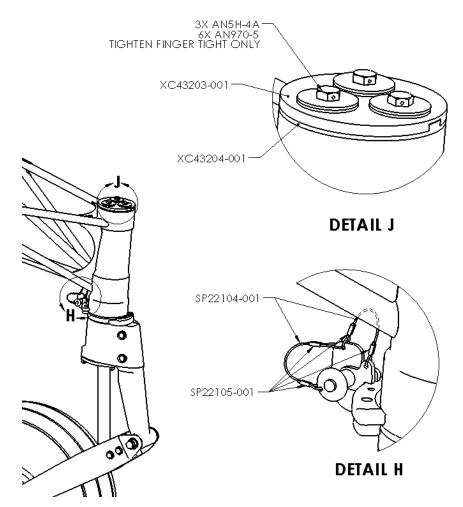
Strut Tension Bolts and Rotational Stop Pin
